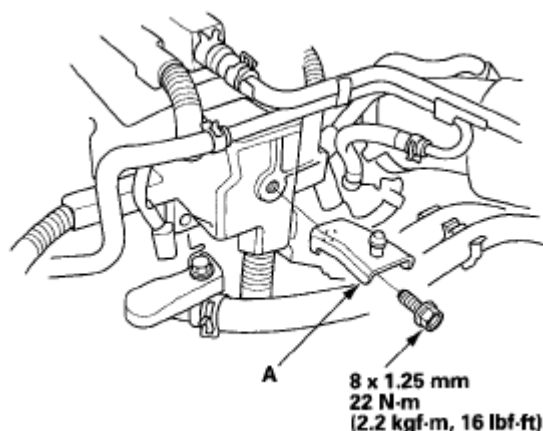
Identifying Air Cleaner Housing Mounting Bracket (With Torque Specifications)
